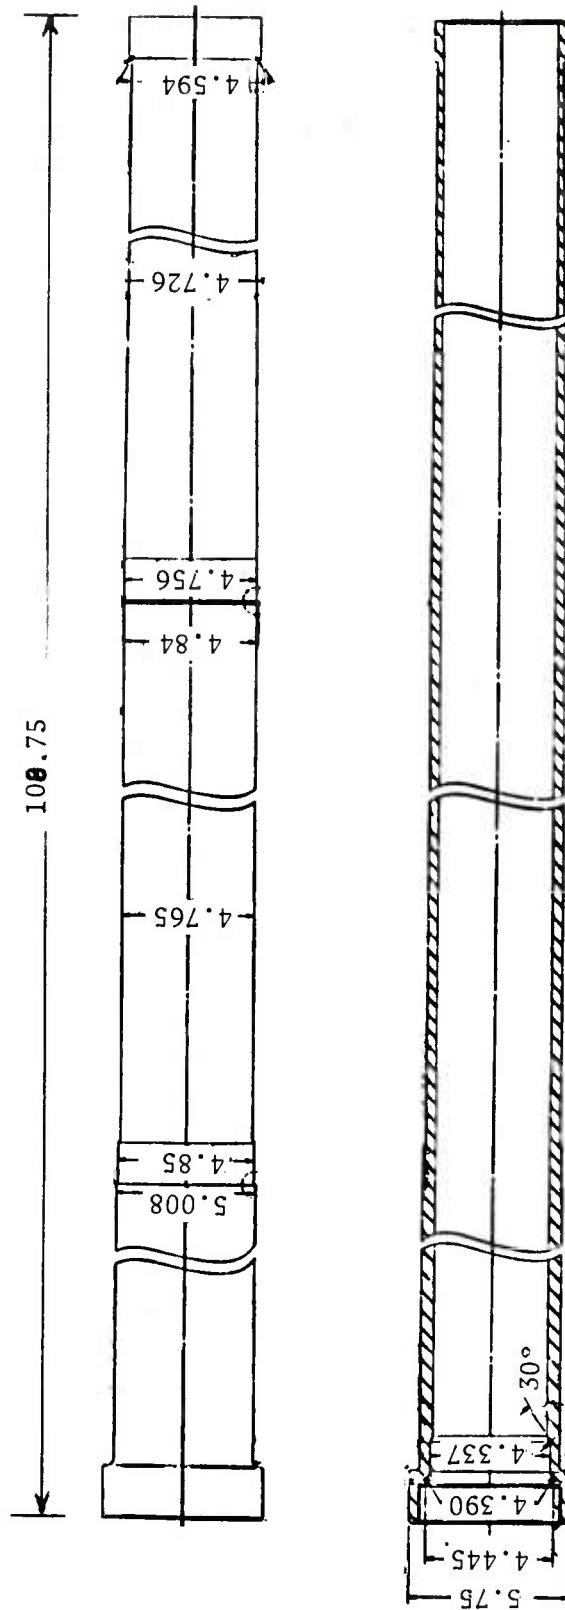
Drawing of Conventional 106mm M40A1 Gun Tube.
